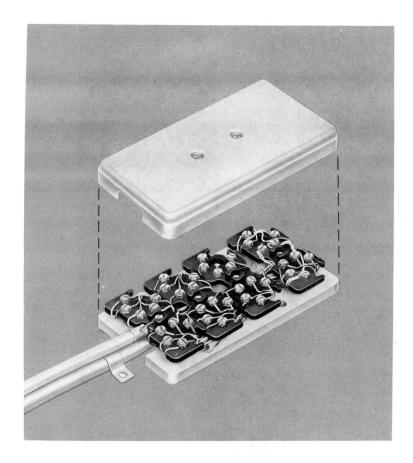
Four 44A Connecting Blocks Mounted on 168F Backboard With Cable and Cord Entering Same End
